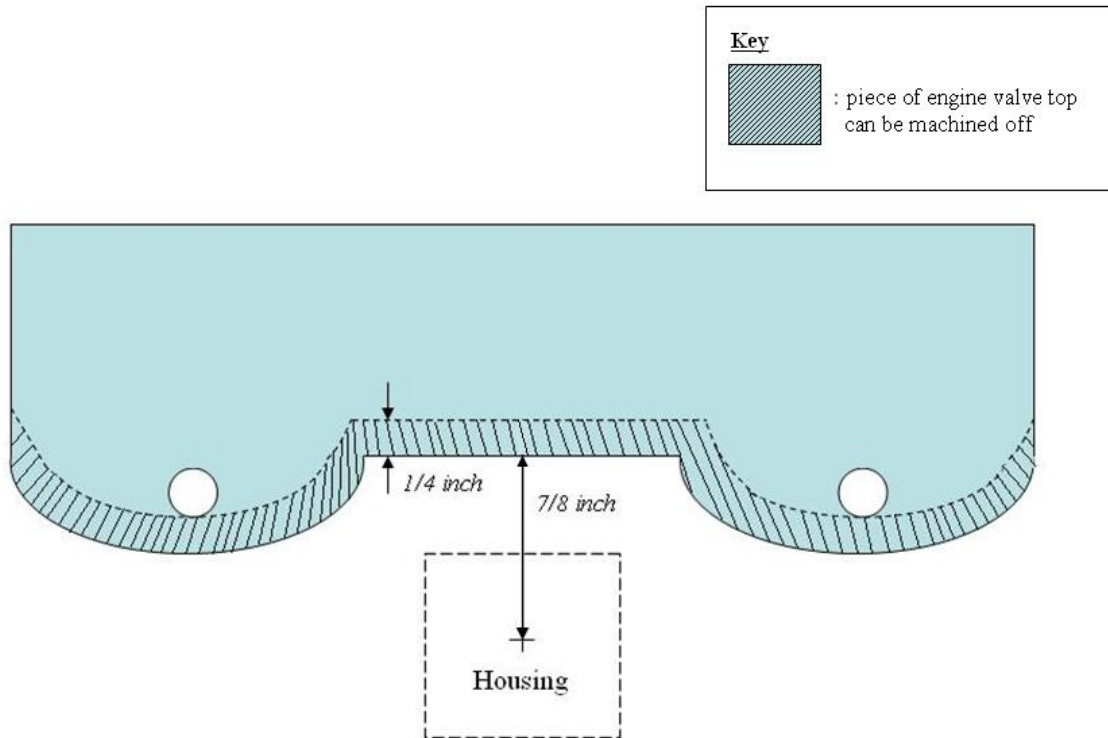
Engine valve cover lip obstructing housing surrounding valve-intensifier mating
